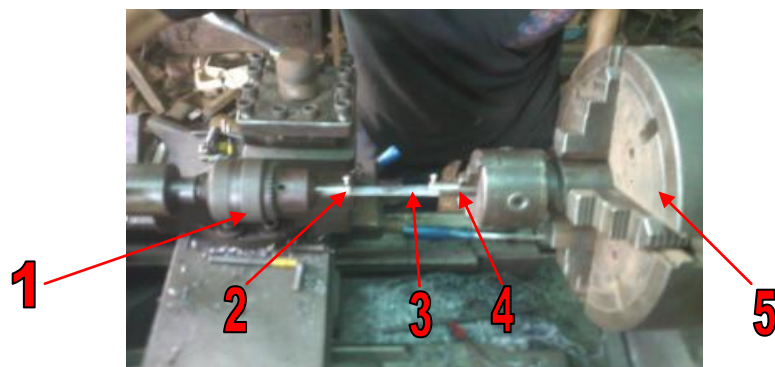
Configuration of Manual Twisting with Lathe Machine: 1. Tailstock, 2. Clamp, 3. Blades, 4. Clamp, 5. Chuck
